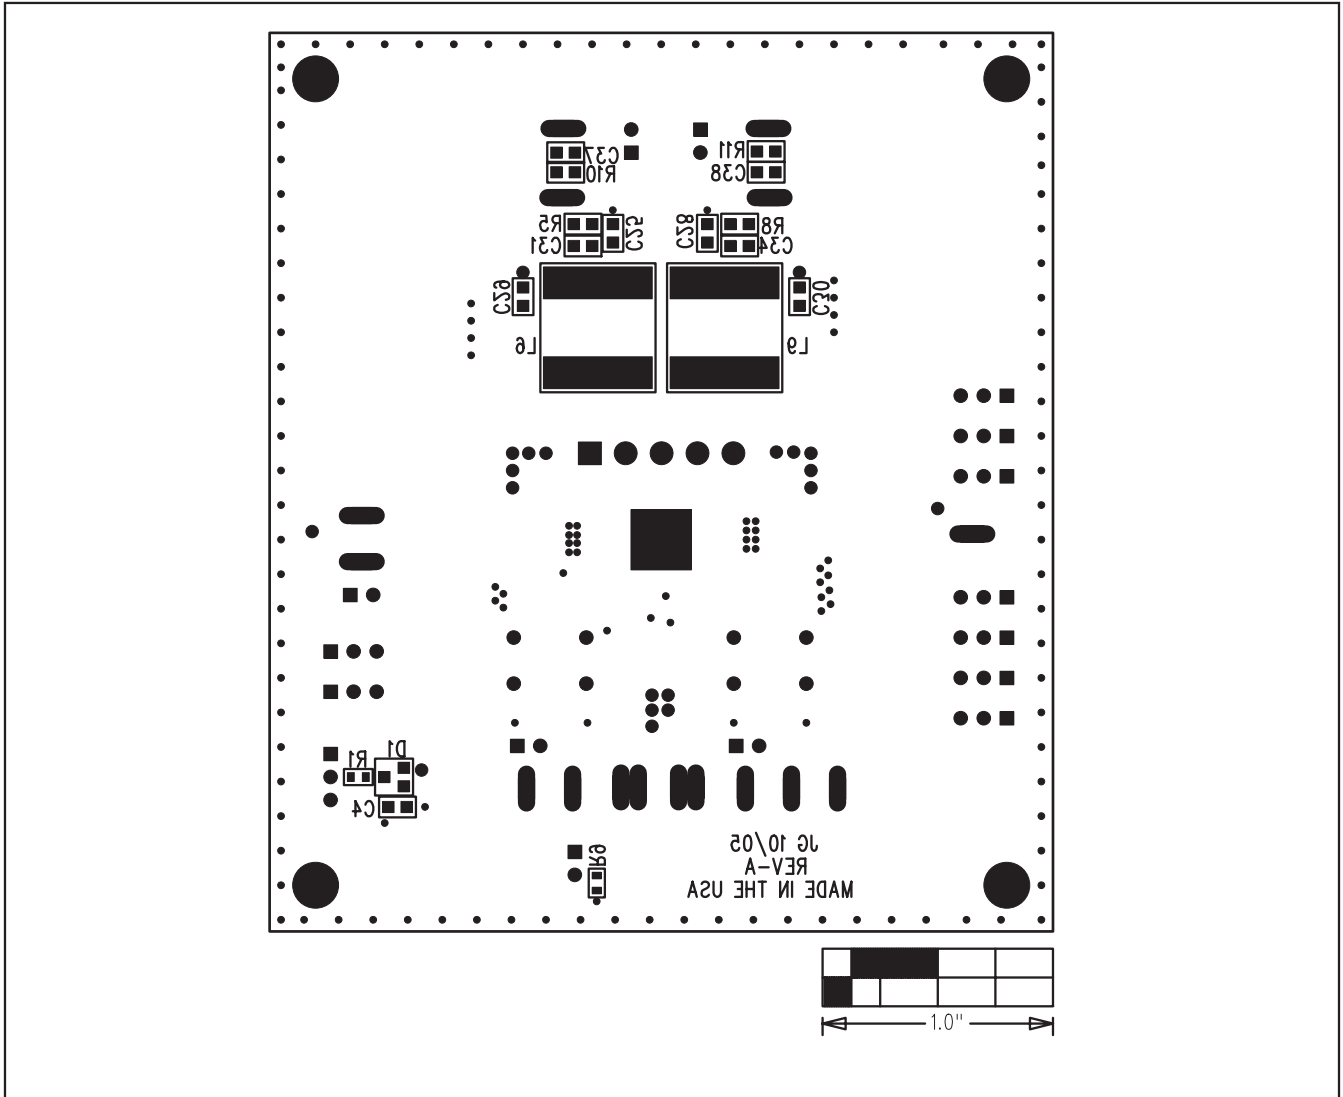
MAX9709 EV Kit Component Placement Guide—Solder Side
